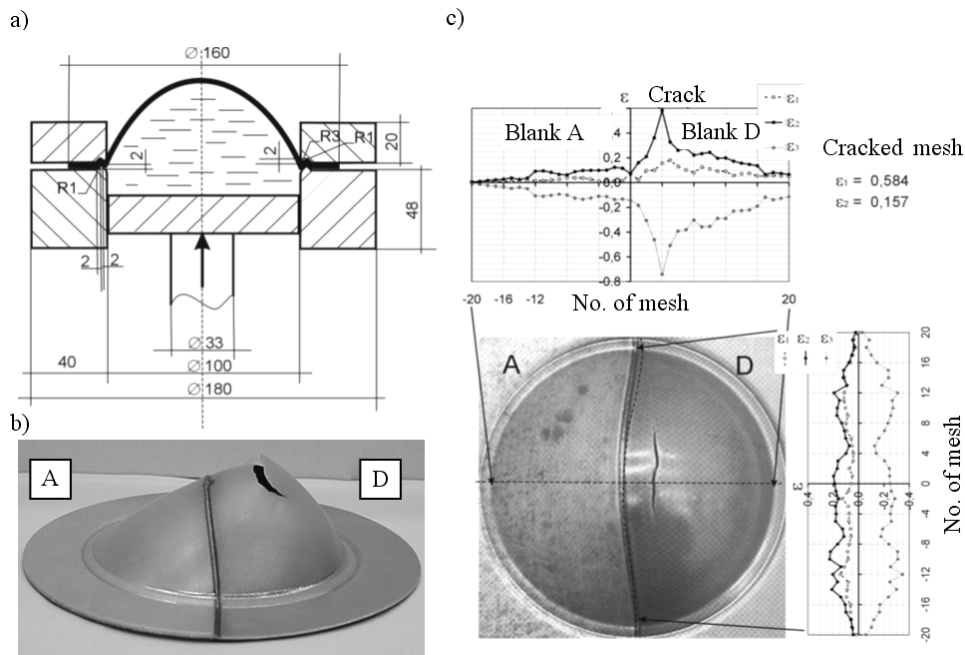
a) Diagram of the tools used in the test of hydraulic bulging in matrix $\varnothing 100$ mm, b) photograph of a drawpiece made of laser welded tailored blanks of A and D, c) distribution of local strain along and perpendicular to the weld for a drawpiece bulged by liquid [12]
